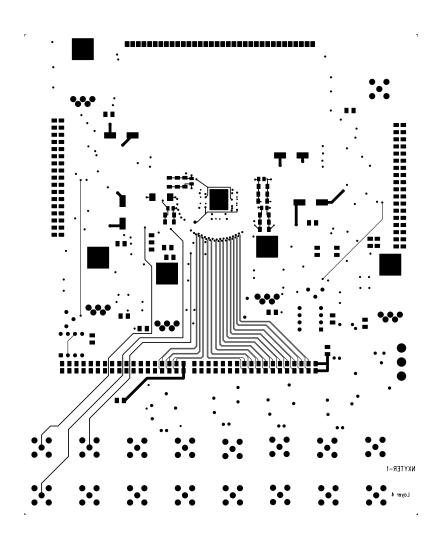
PCB of the test board (layer 4 of 4)  $\,$
